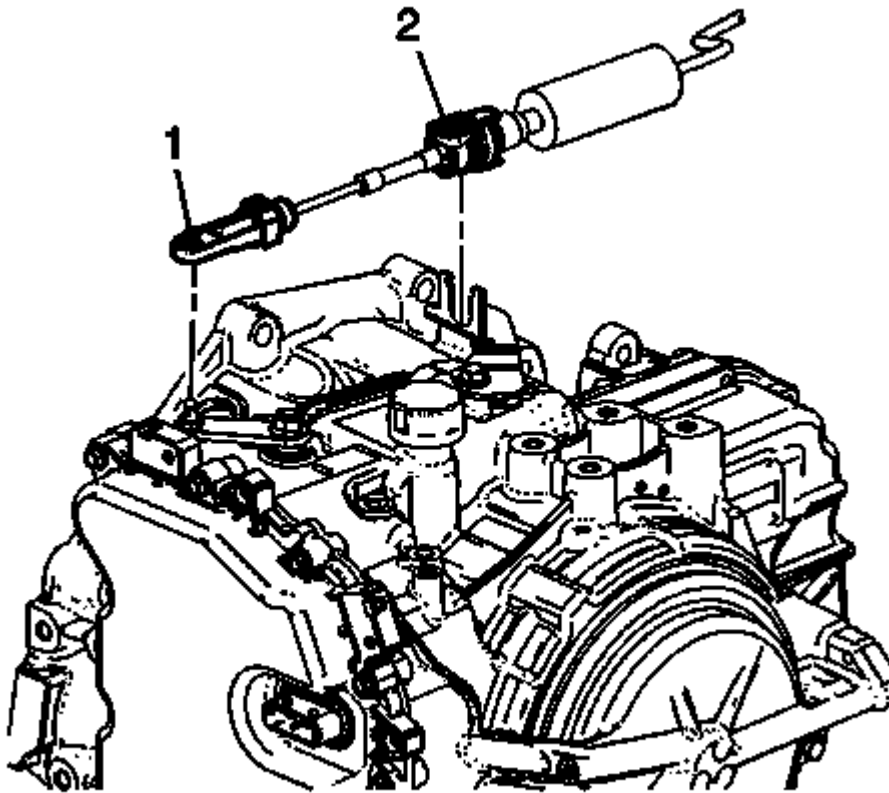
View Of Transmission Range Selector Lever & Cable Connection
